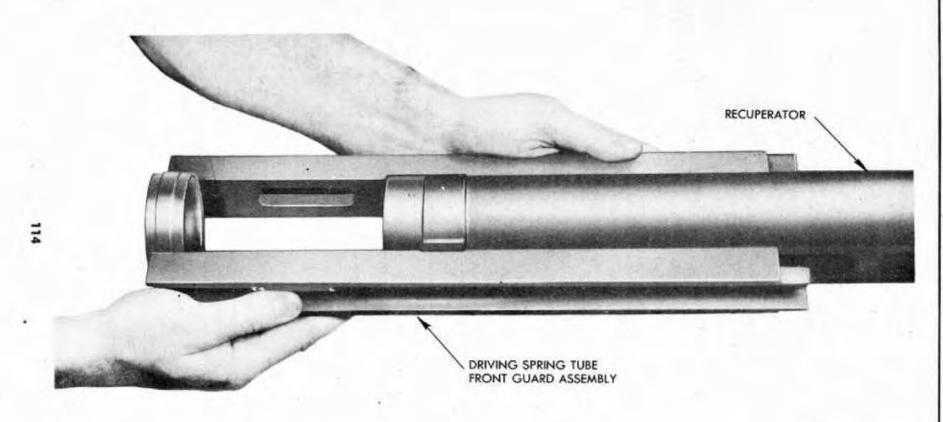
Removing Driving Spring Tube Front Guard Assembly
